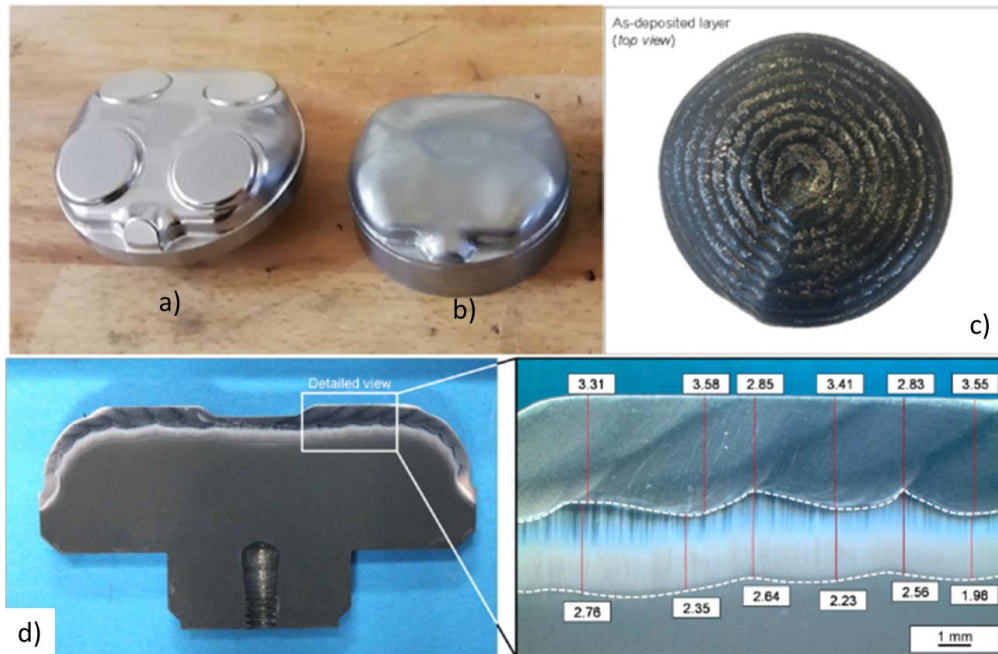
Wire Arc AM for mold repair. a) original component b) component with damaged faces removed c) component with added metal layer d) cross section after AM process [32]
